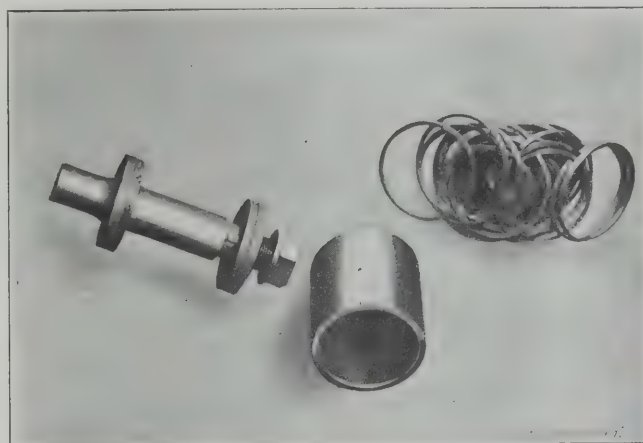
Mandrel for Holding Rings when Grinding the Outside
